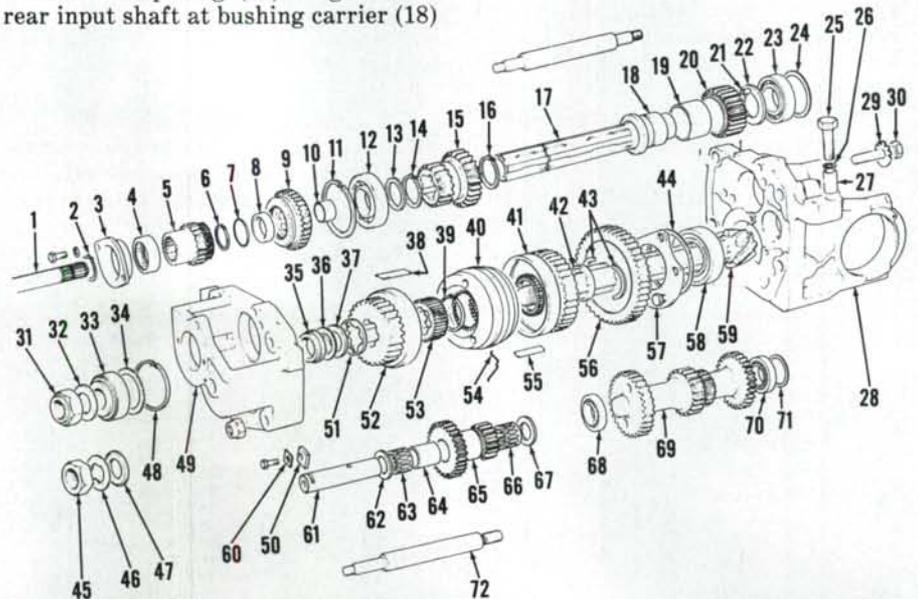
Exploded view of 12-speed synchromesh transmission used on 1190, 1194, 1290, 1294 and 1390 models.
